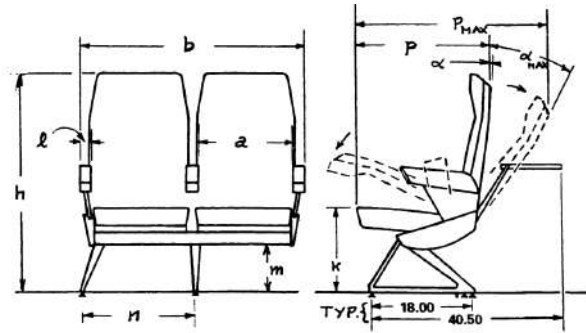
Definition of Seat Dimensions in Table 3.1
